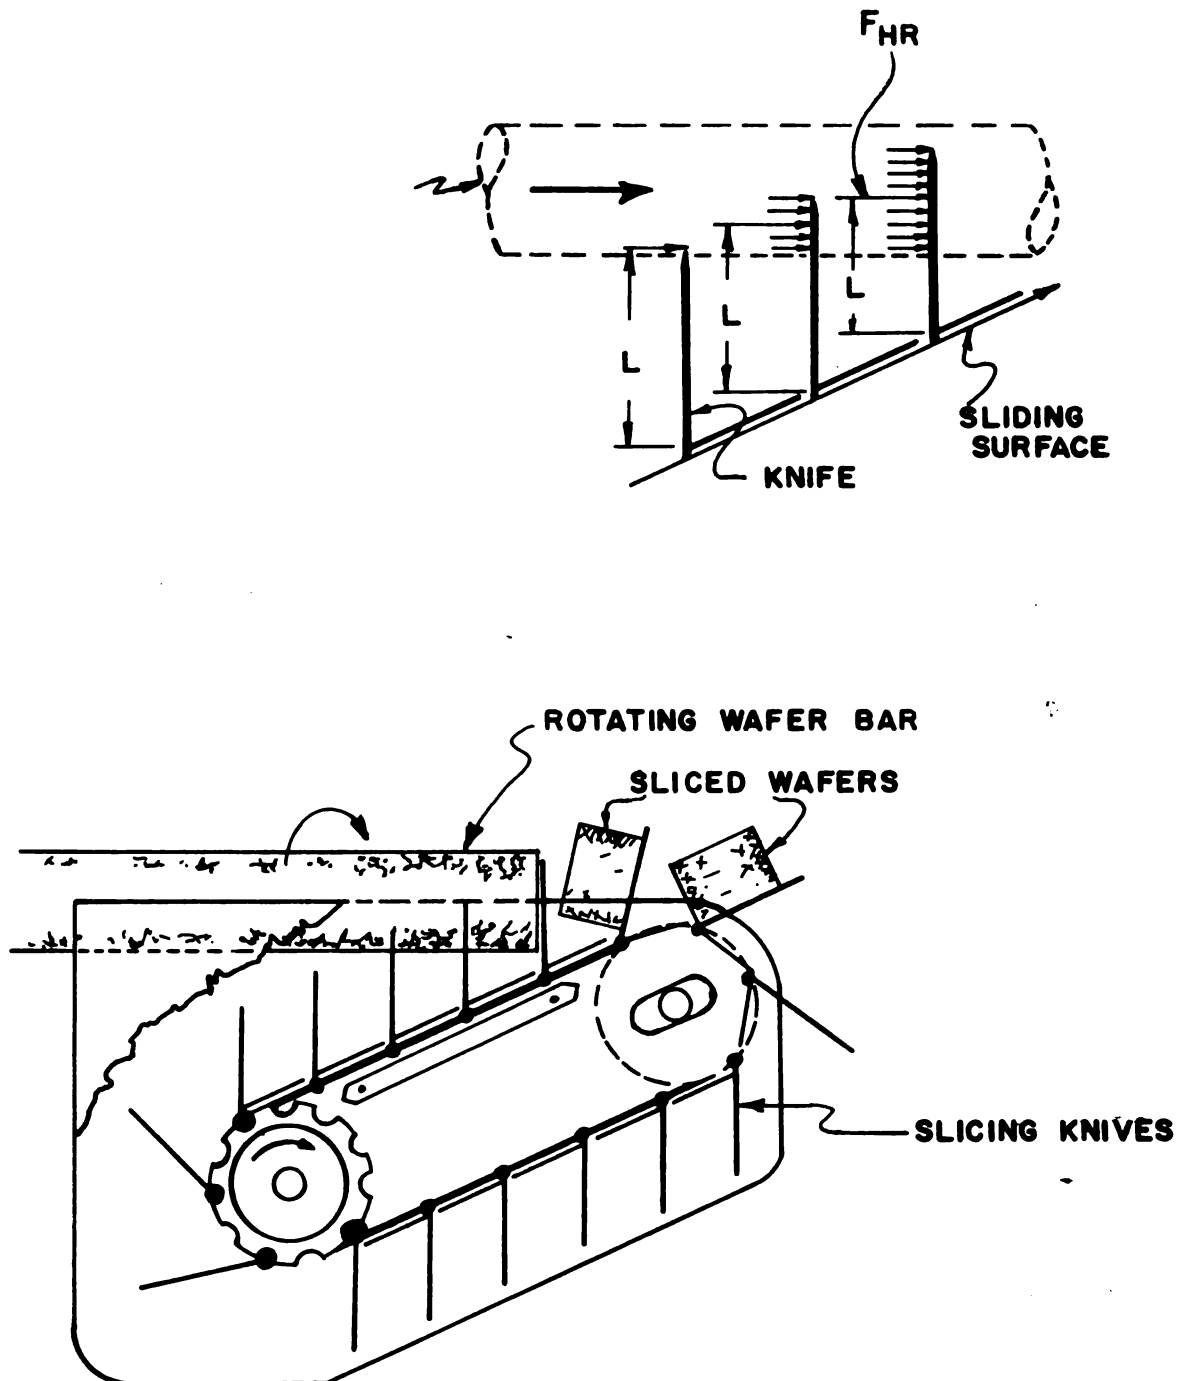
SLICING DEVICE FOR THE ROLLING WAFERING APPARATUS
